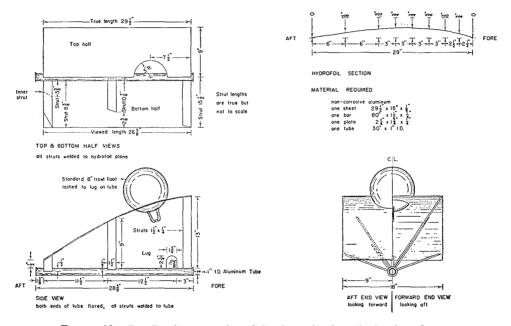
Details of construction of the sheet aluminum hydroplane float.
